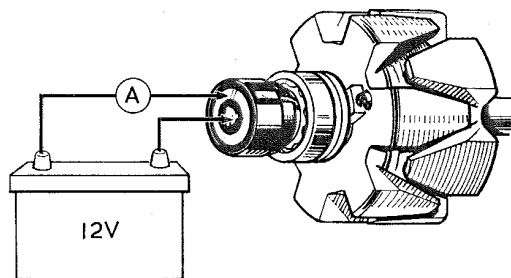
Measuring rotor winding resistance with battery and ammeter
